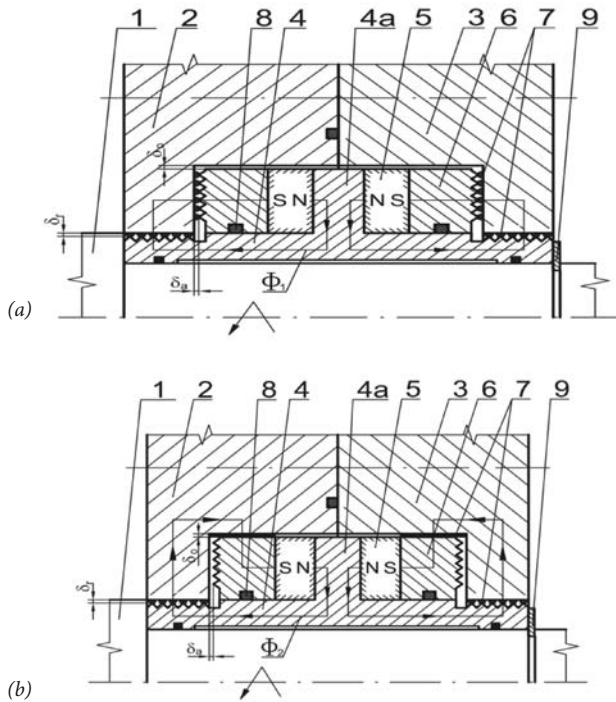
Centrifugal magnetic fluid seal for rotating shaft with rotary magnetic system (a) at low rotating shaft speed, (b) at high rotating shaft speed: 1 - shaft, 2, 3 - elements of housing, 4 - flanged sleeve, 4a - flange, 5 - permanent magnet, 6 - pole piece, 7 - magnetic fluid, 8 - "O"-ring seal, 9 - snap ring, δ_a - axial sealing gap, δ_r - radial sealing gap, δ_o - circumferential sealing gap, Φ_1 , Φ_2 - closed magnetic circuits
